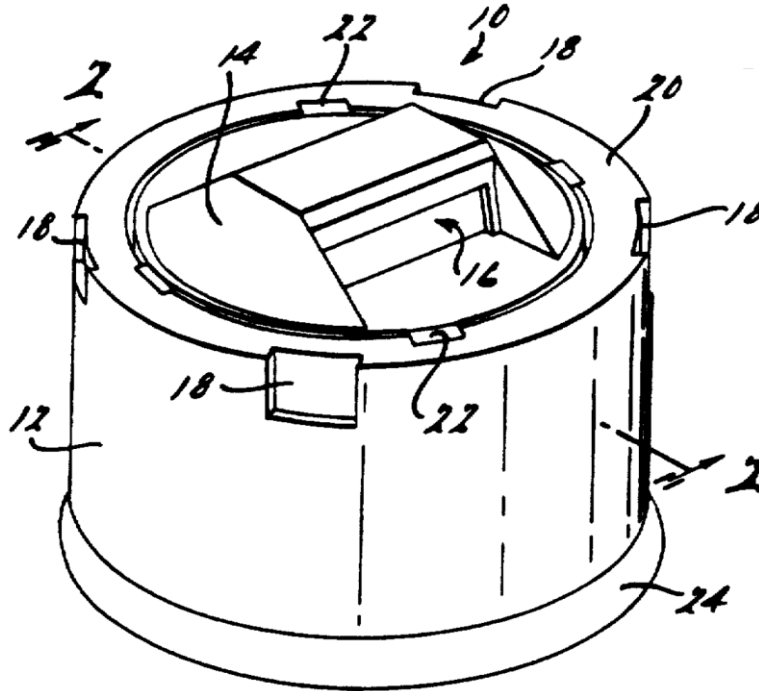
Design of raised depressible pavement marker by Paulos (32)
